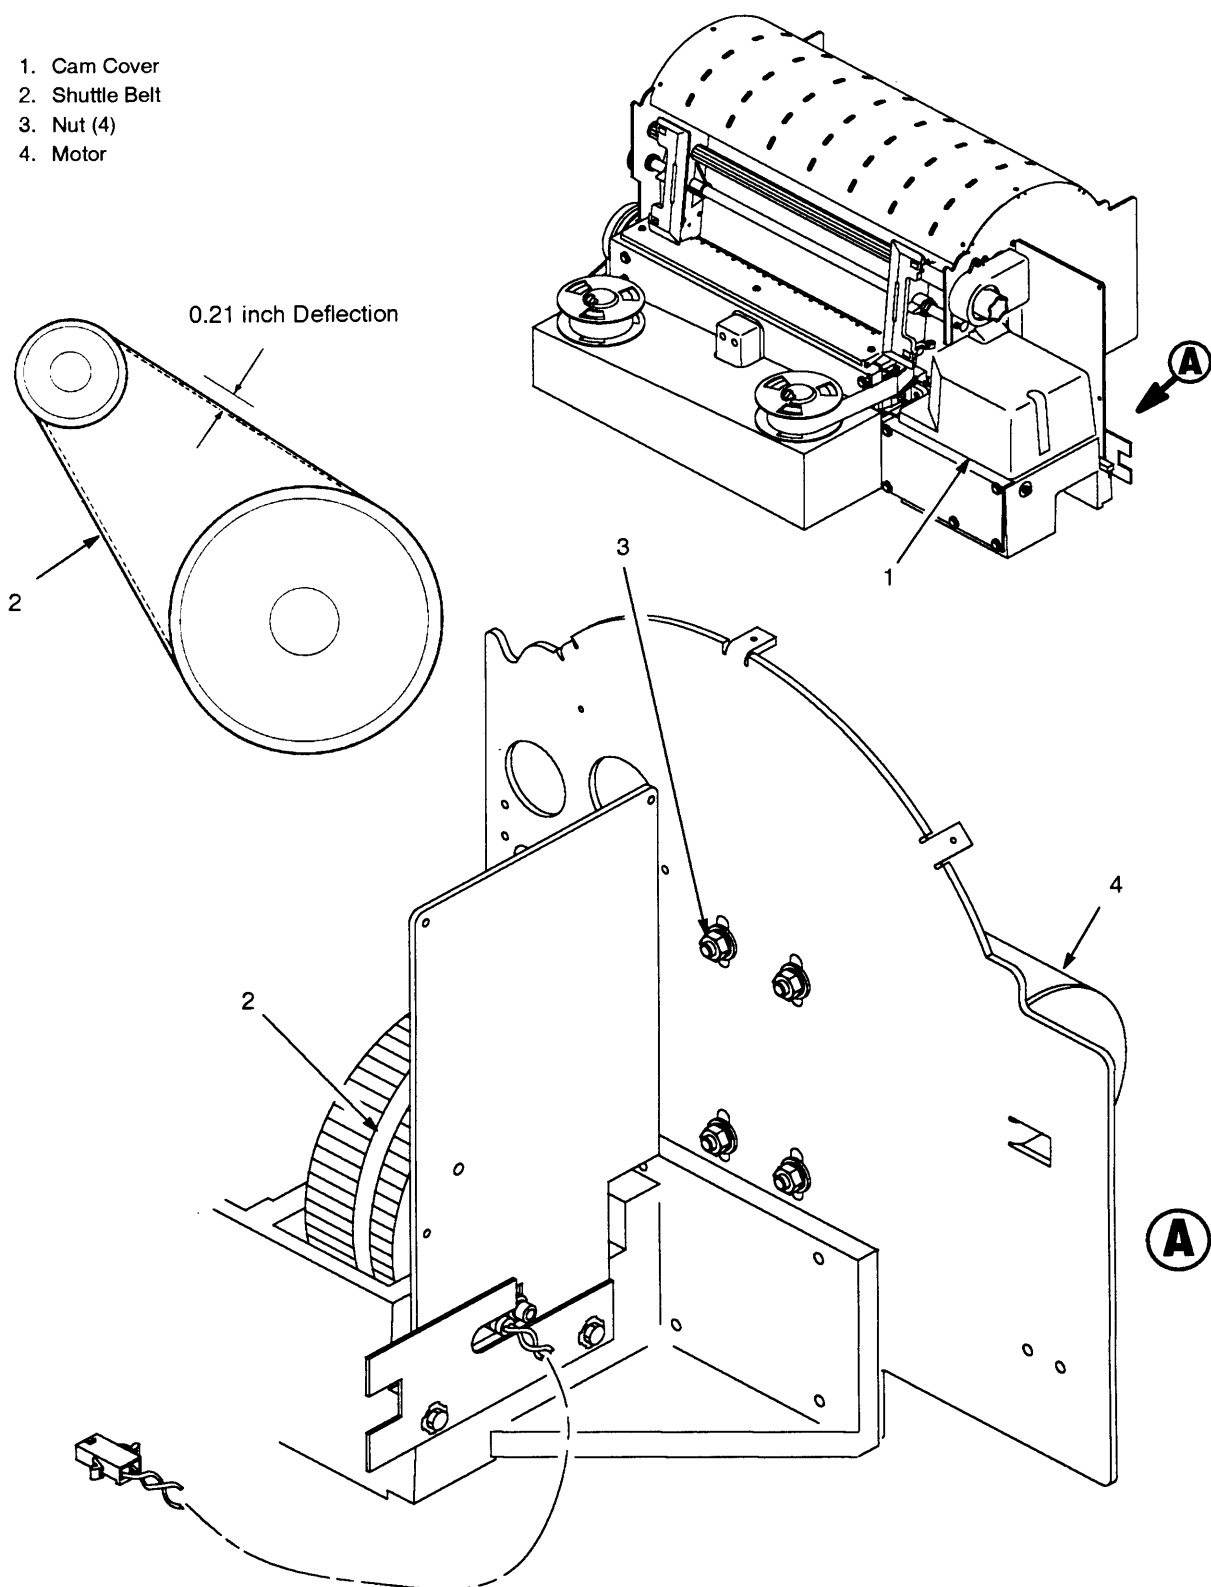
Shuttle Belt Tension Check and Adjustment
